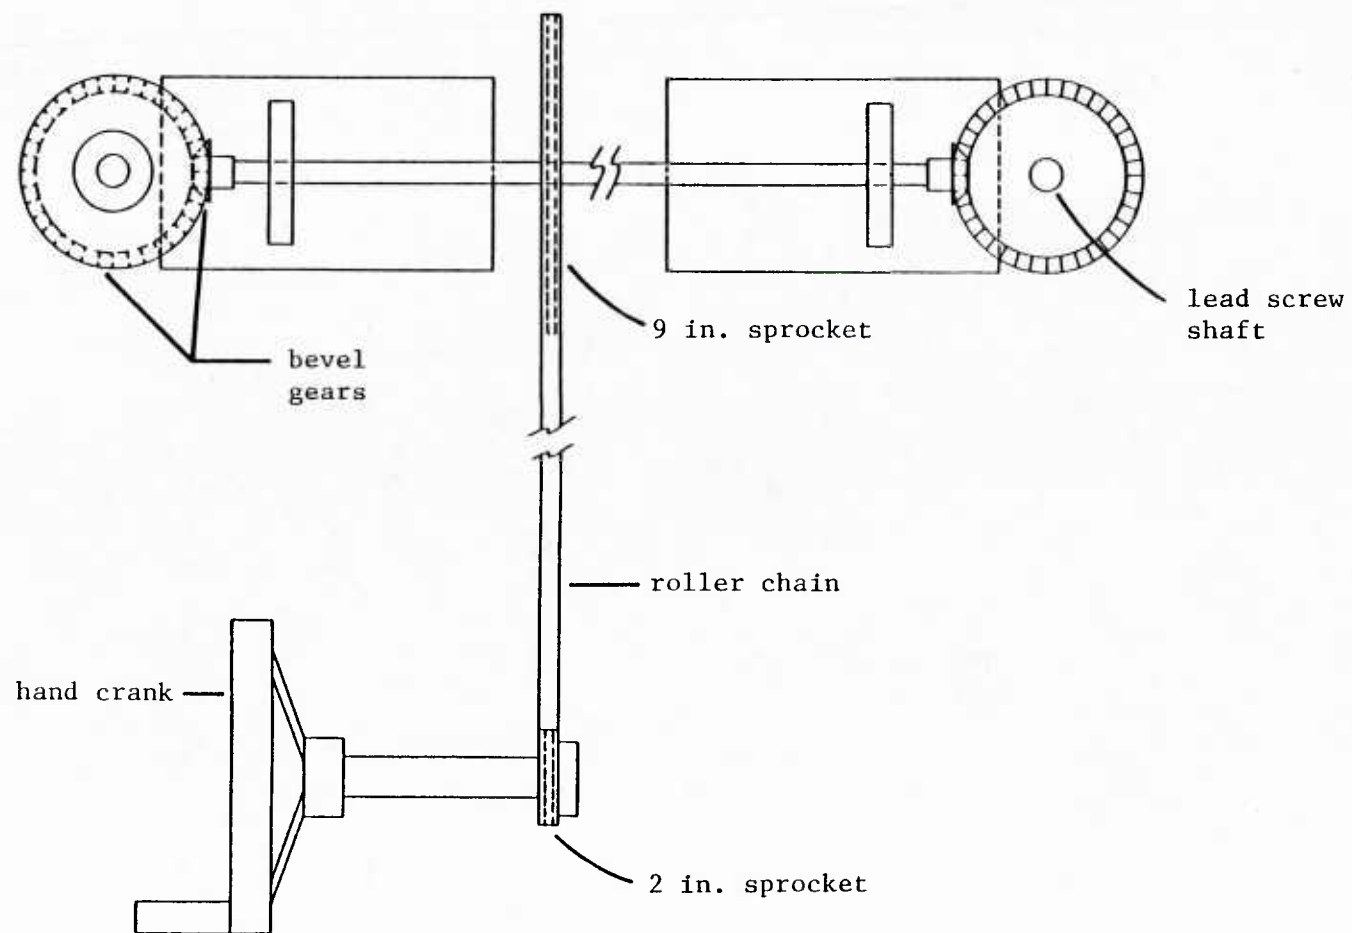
Top View of Mechanical Connection Between Lead Screw Shafts
